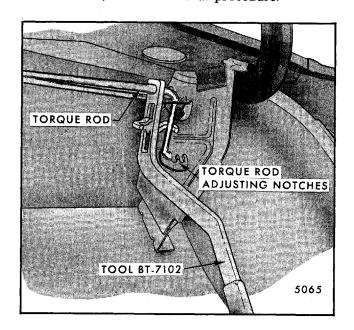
Rear Compartment Torque Rod Adjustment - Oldsmobile E Styles
